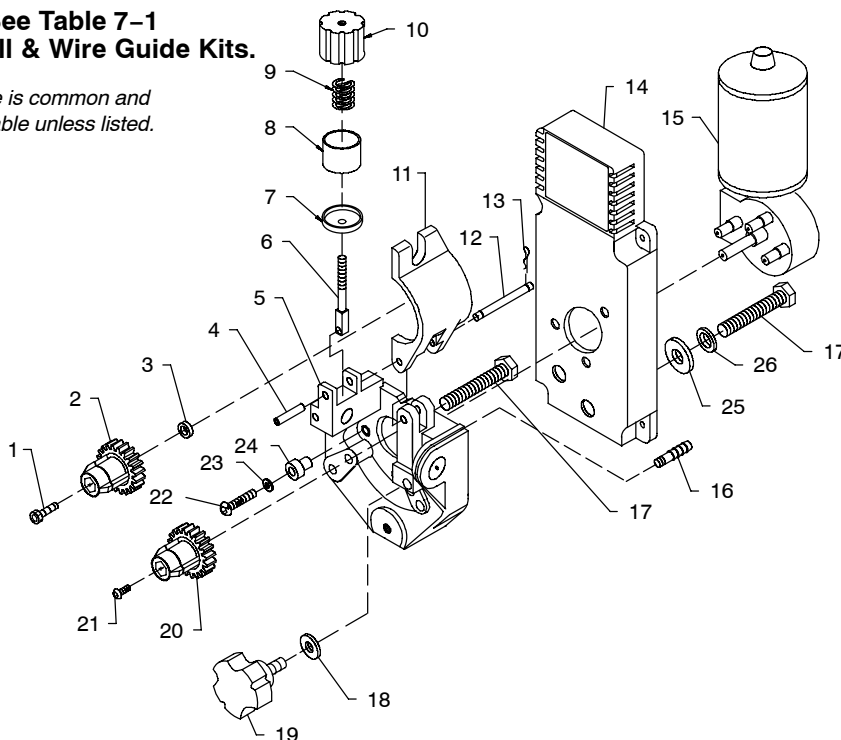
Wire Drive And Gears (Prior to LF430261B)
